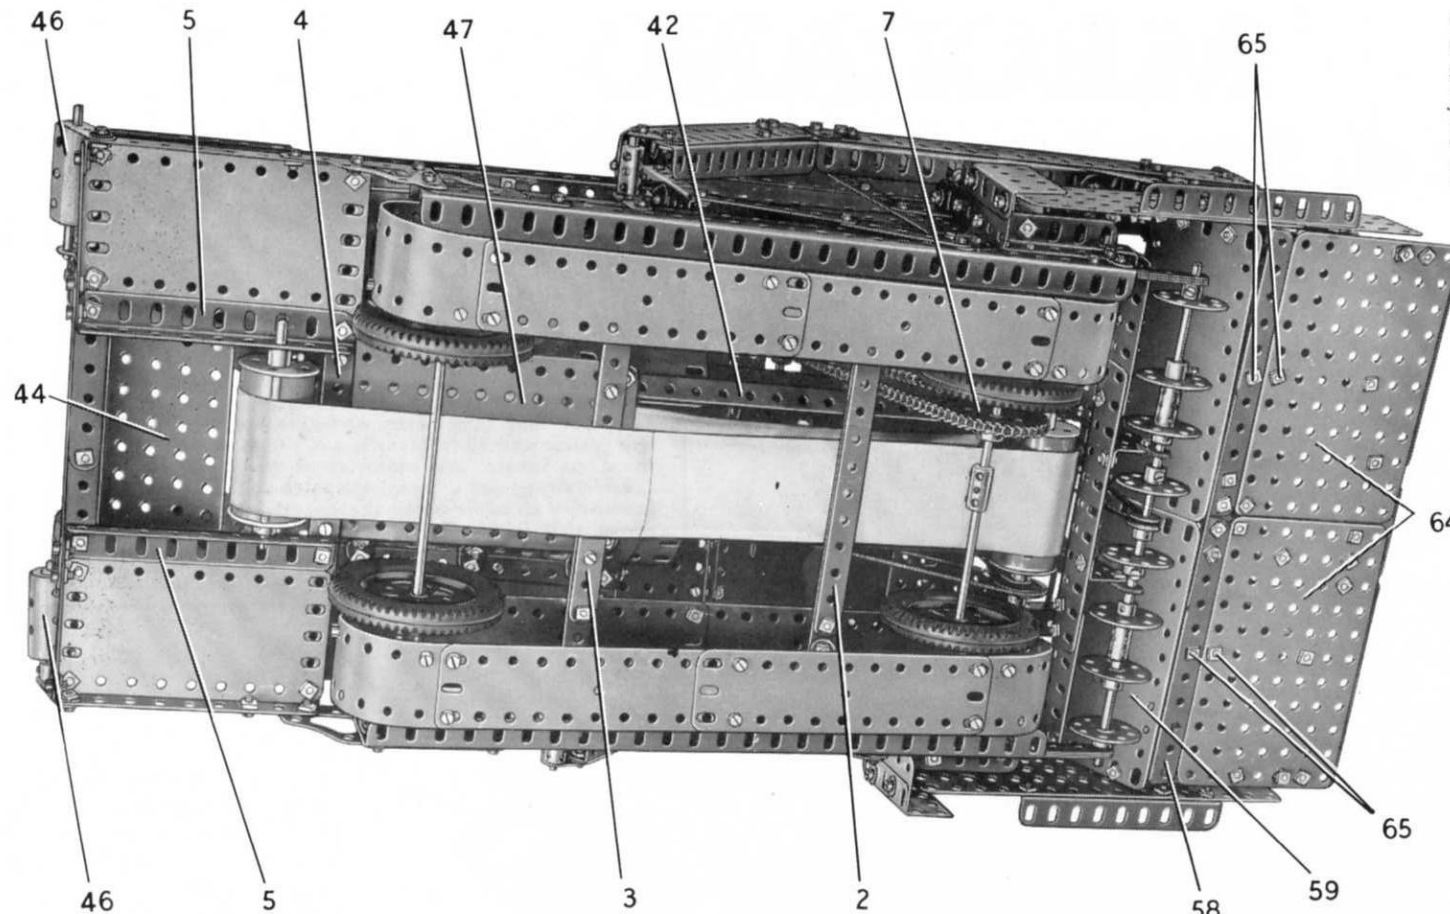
An underneath view of the Road Surfacing Machine showing details of the main frame and the conveyor. As the asphalt leaves the conveyor it is distributed over the road surface by the column of revolving Bush Wheels seen at the rear end of the machine
